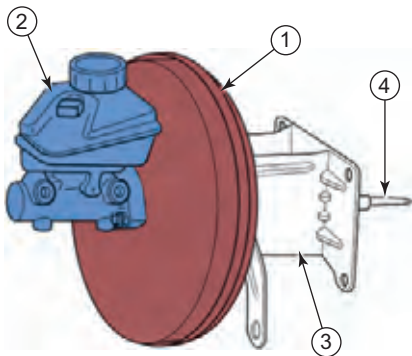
Servo unit: 1 – brake disc; 2 – master cylinder and fluid reservoir; 3 – bracket; 4 – diaphragm rod connection to brake pedal
